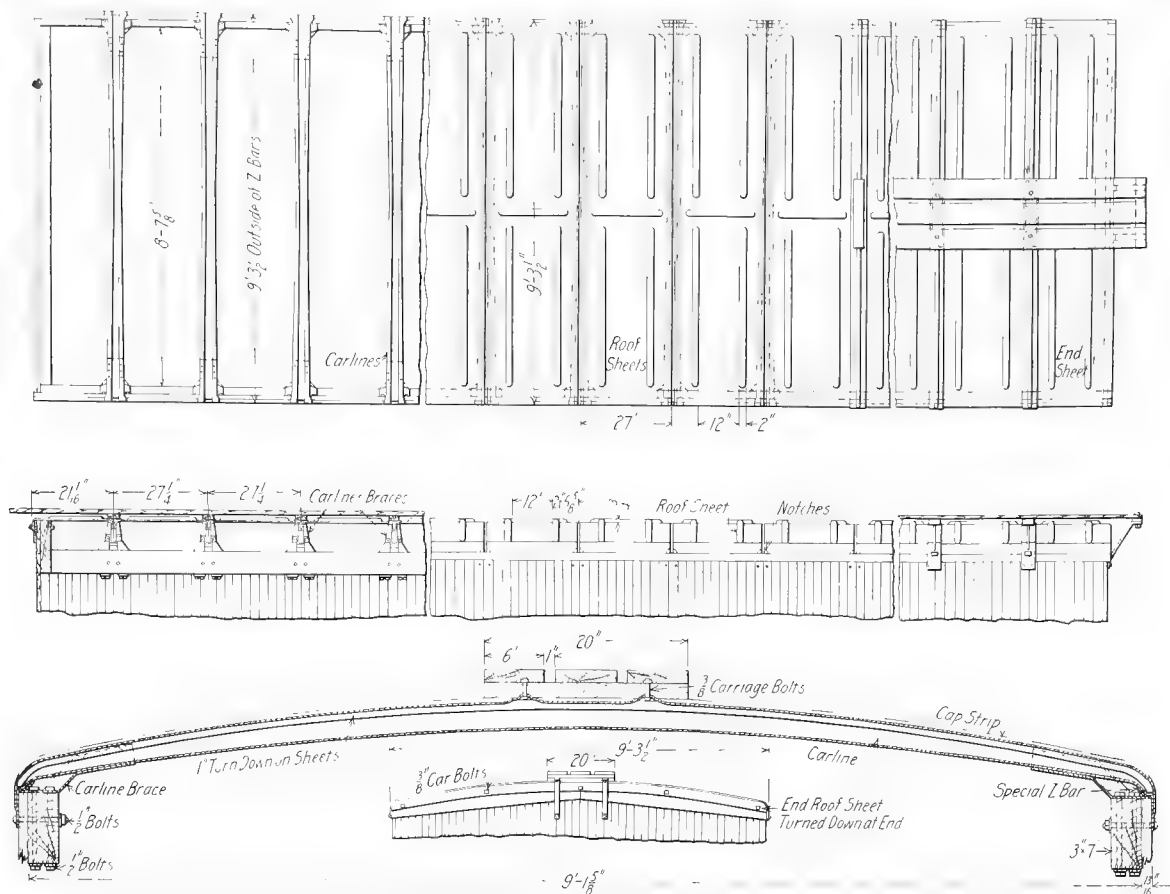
Christy Steel Car Roof Applied to Atchison, Topeka & Santa Fe Box Car. American Car Roof Company
